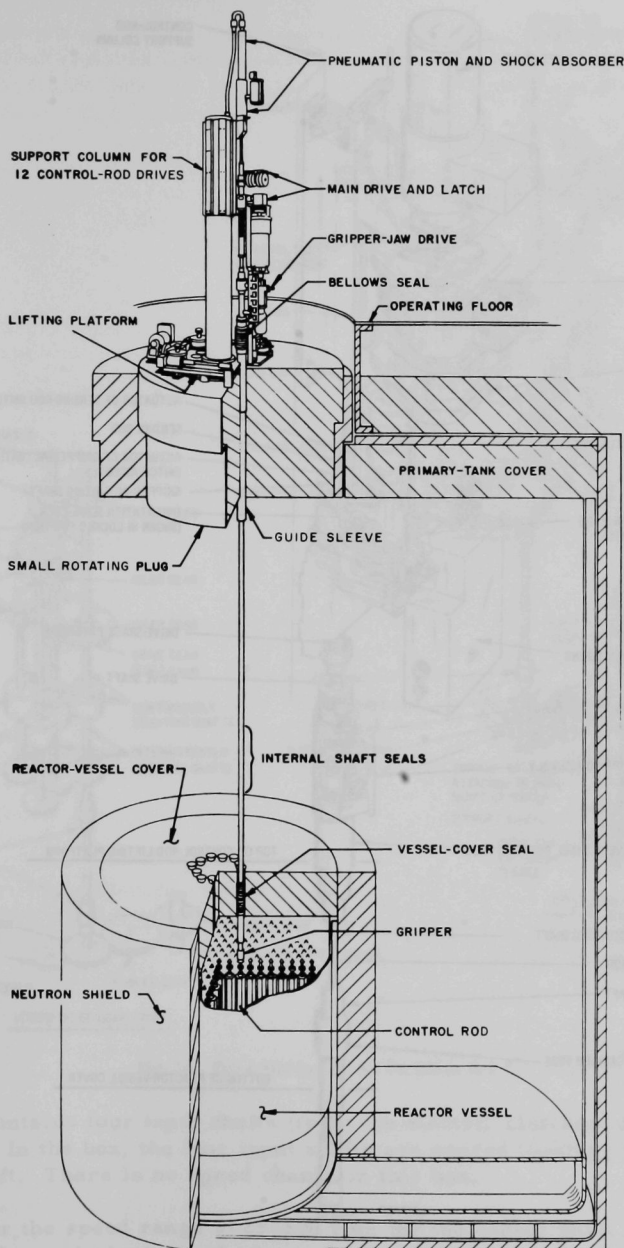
EBR-II Control-rod Drive. ANL Neg. No. 112-4396 Rev. 1.
